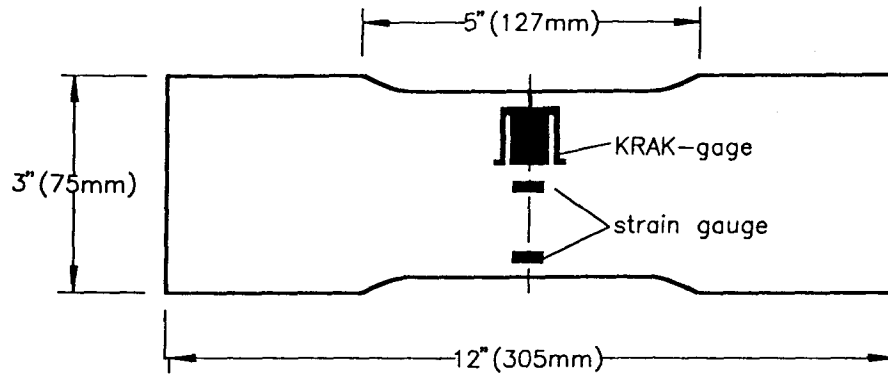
Geometry of the specimen for out-of-plan bending load
